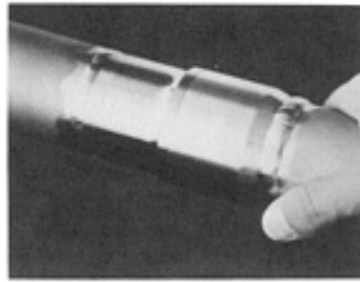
ALUMINUM-TO-STAINLESS WELD ACCOMPLISHED WITH AN EXPLOSION-BONDED TUBULAR TRANSITION JOINT. ALUMINUM AND STAINLESS STEEL ARE WELDED TO THE RESPECTIVE ENDS USING CONVENTIONAL FUSION-WELDING PROCESSES.
